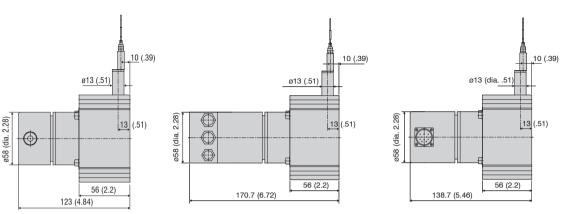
Dimensional drawing WDS- ... - P96 -CR - HTL/TTL
